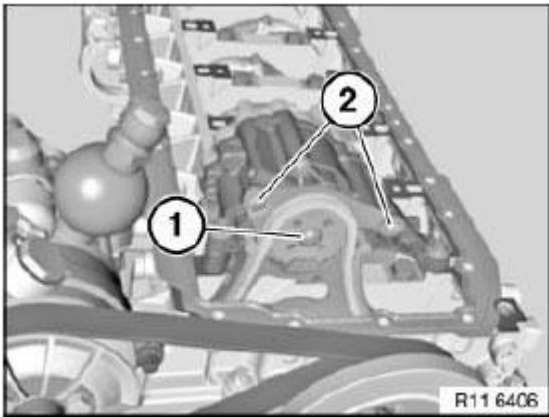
Identifying Oil Pump Housing Bolt And Screws
